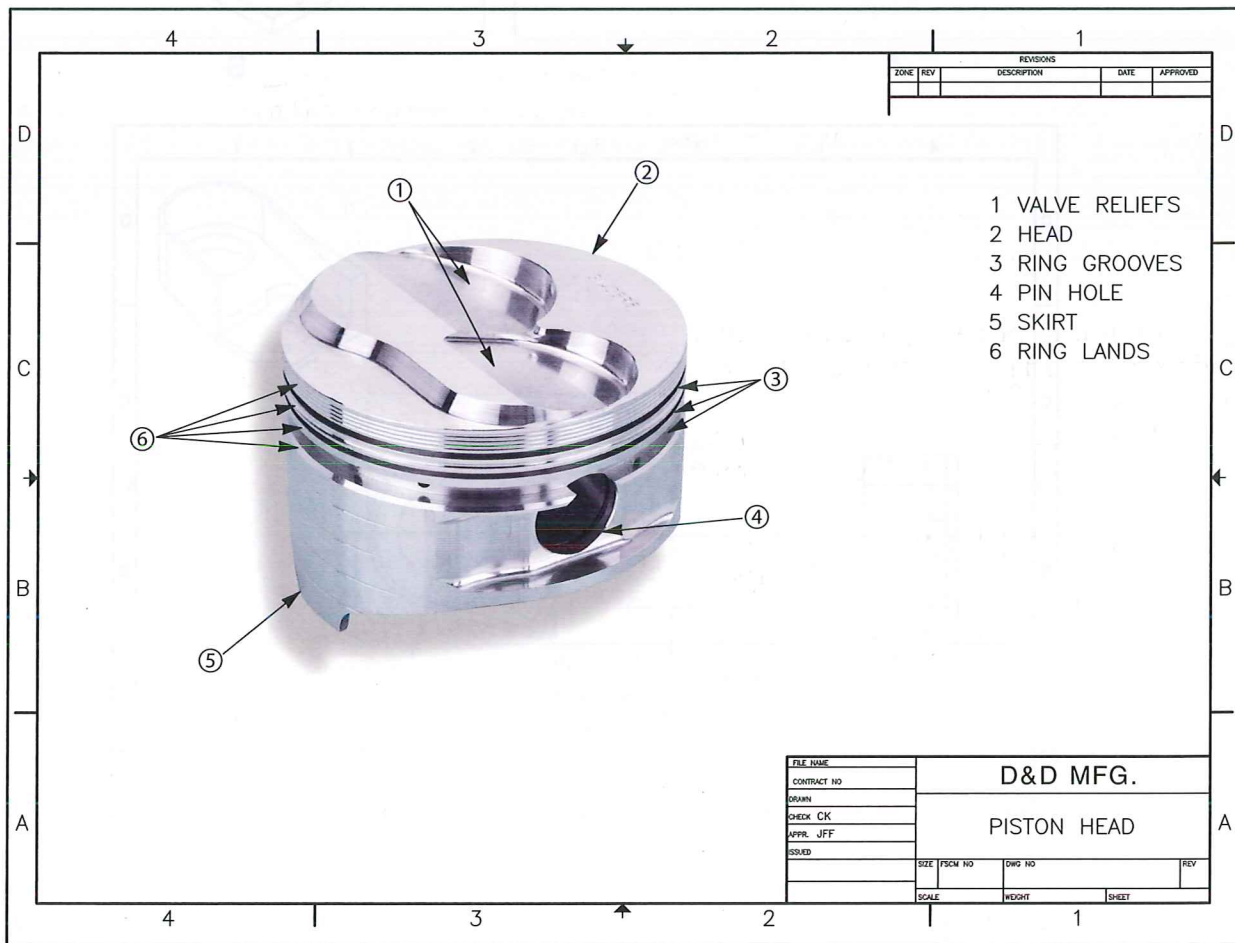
A photodrawing is a photograph of an object that is reproduced on drafting film, or paper, with notes and callouts added to complete the drawing. (Photograph courtesy of Holley Performance Products)
